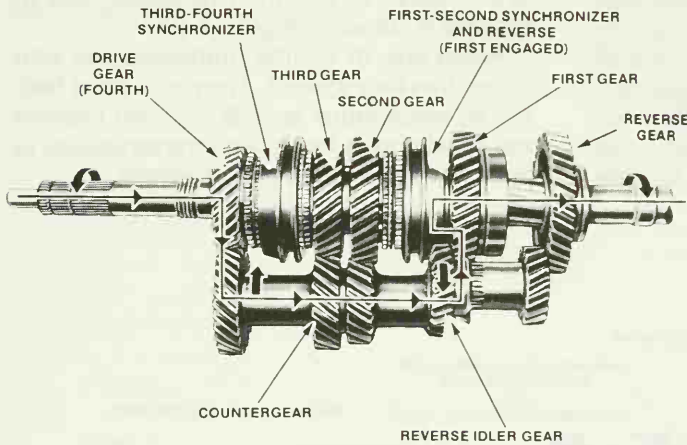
Power flow through a four-speed transmission in 1st speed or low gear. (Chevrolet Motor Division of General Motors Corporation)
